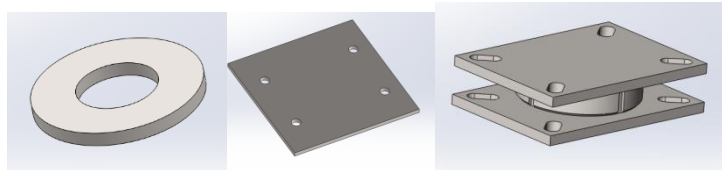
The gear spacer, turntable adapter, and turntable round out the lift assembly
